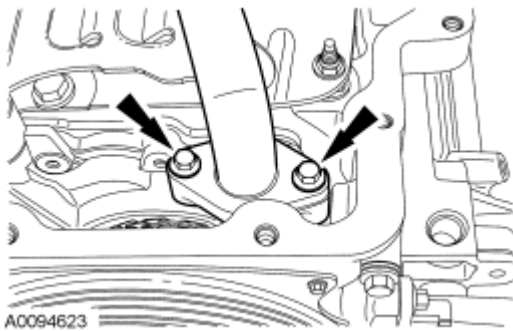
Locating Oil Pump Screen & Pickup Tube Bolts
